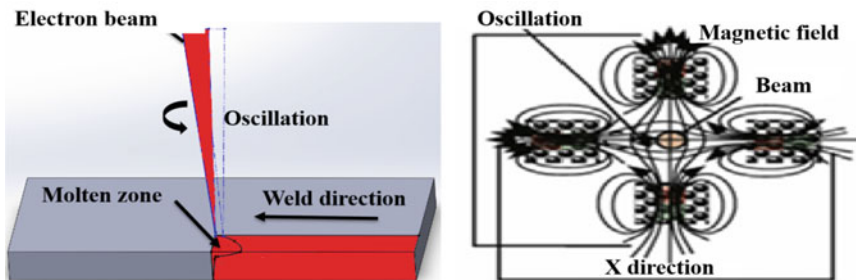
Schematic of electron beam welding process with oscillating beam [23]. (Color figure online)
